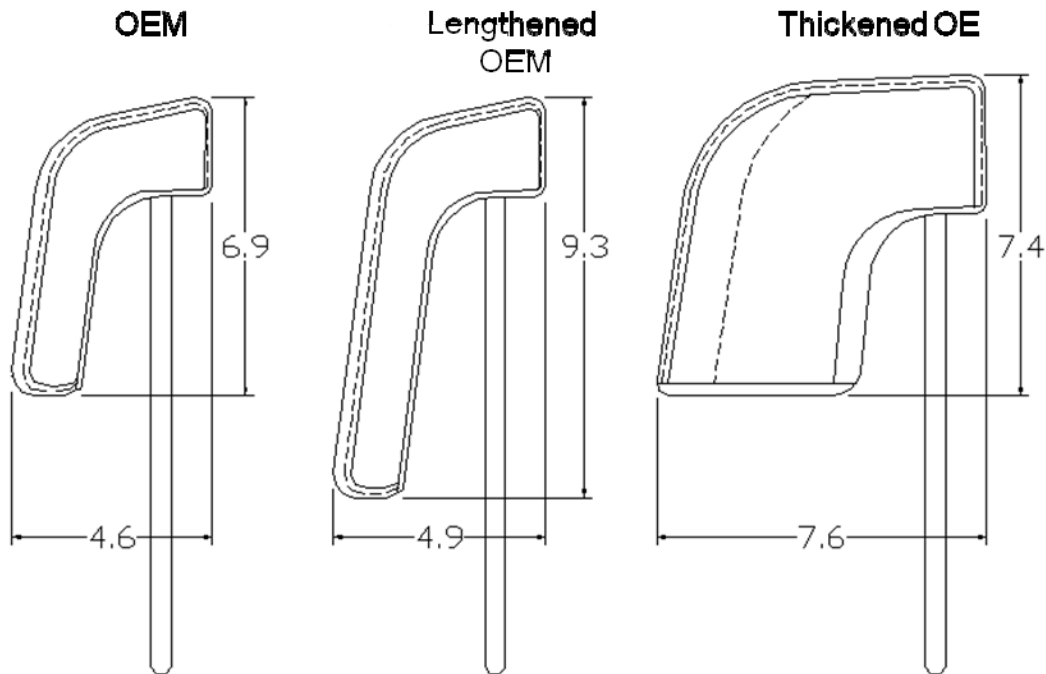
Side view drawing of three head restraint conditions (units: inches).
